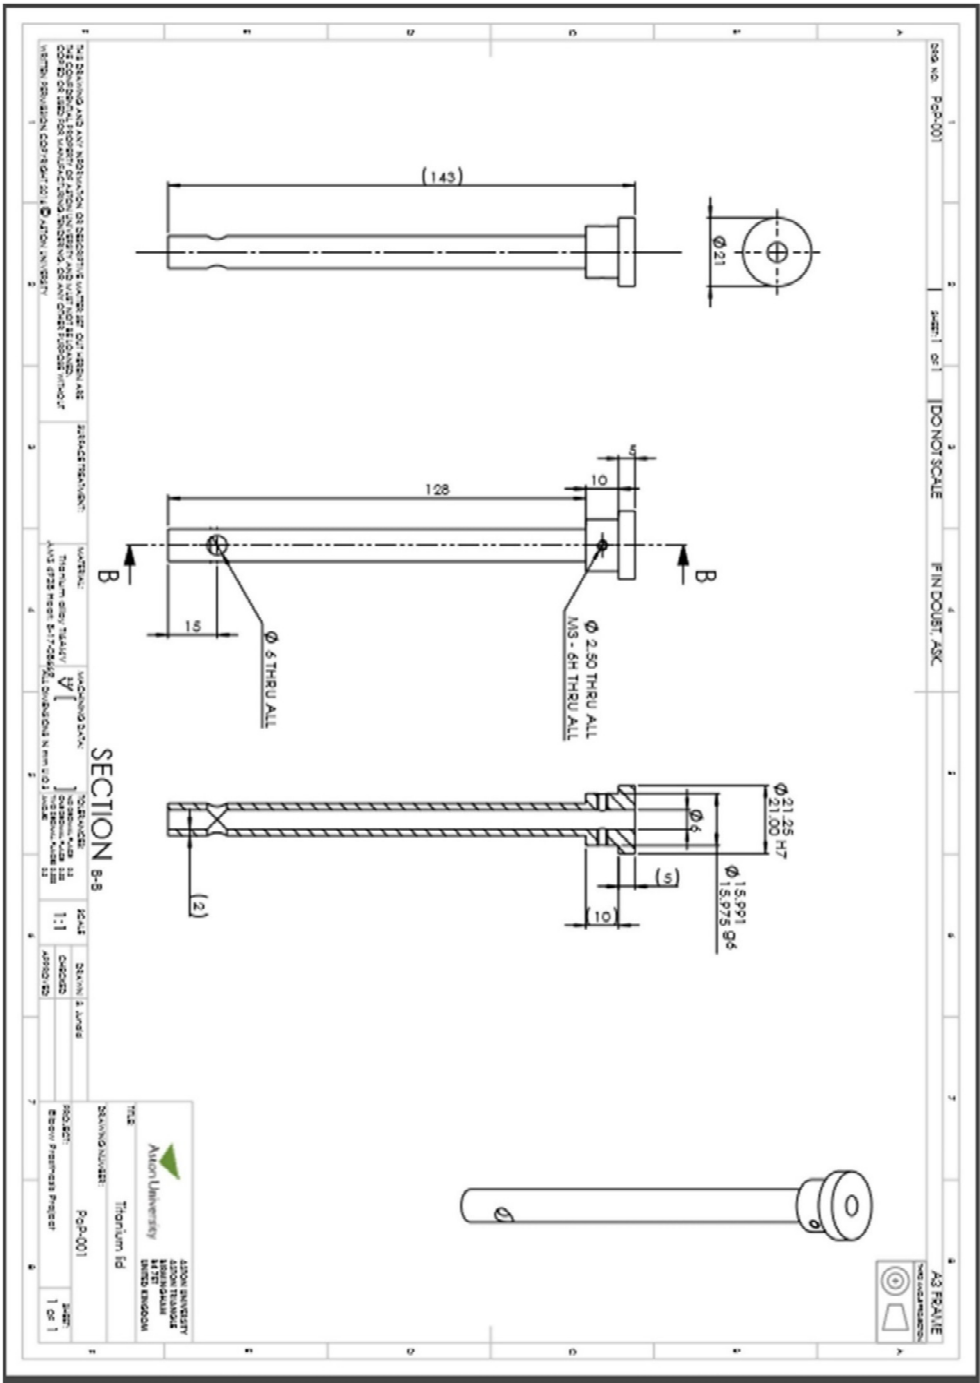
Technical Drawing for the Inner Tube of the Humeral Stem.
